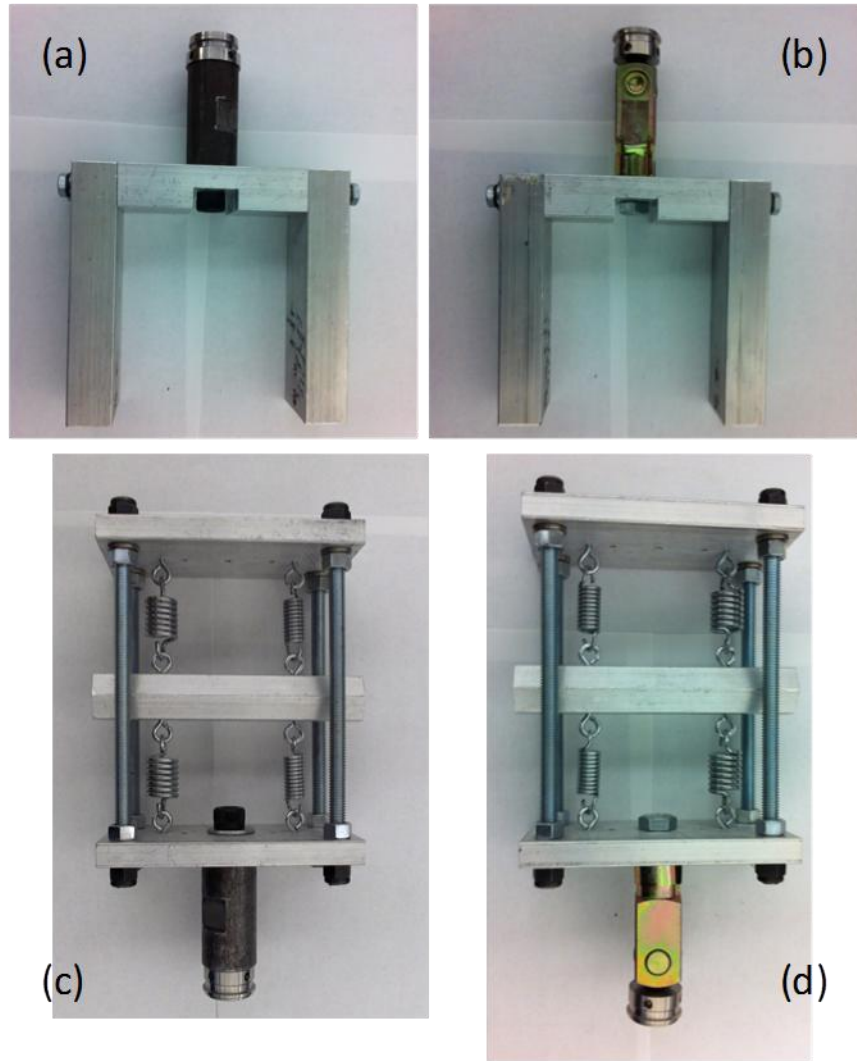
Physical prototype of bushing fixture concept for (a) upper fixture – fixed condition, (b) upper fixture – pinned condition, (c) lower fixture – fixed condition, and (d) lower fixture – pinned condition
